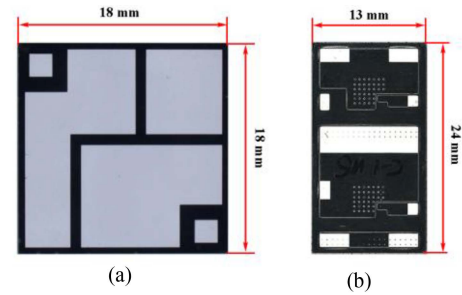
Outline size of PCB embedded packaging cells selecting (a) panel and (b) AMB or lead-frame as carrier.
